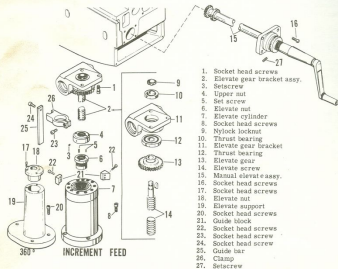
Knee Elevate Mechanism (360°) And Increment Feed)
